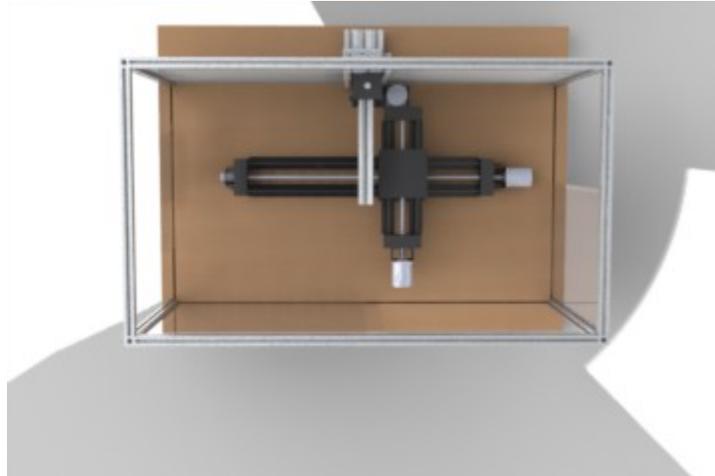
Top view of gantry system model with attached x-y motion stages for actuating the build platform and a separate z-axis with attachment points for the mixer and extruder
